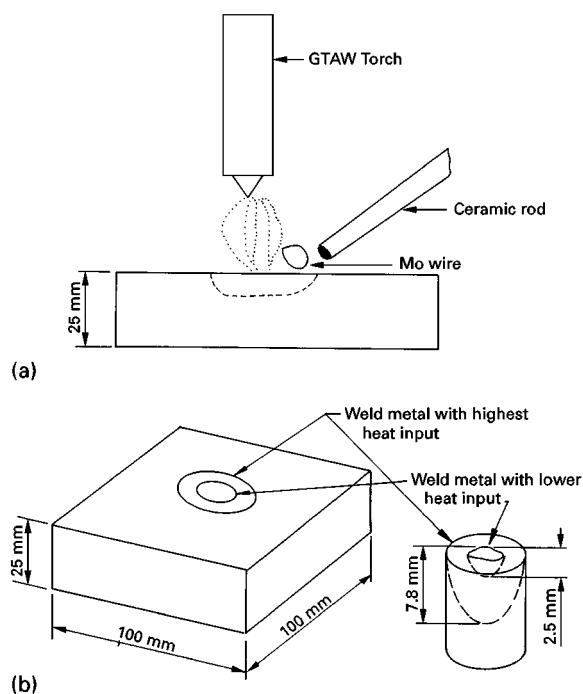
(a) Representation of the stationary arc TIG (SATIG) welding by adding molybdenum wire. (b) A 316 SS weld pad showing the location of the weld metals and the machined weld metal.
